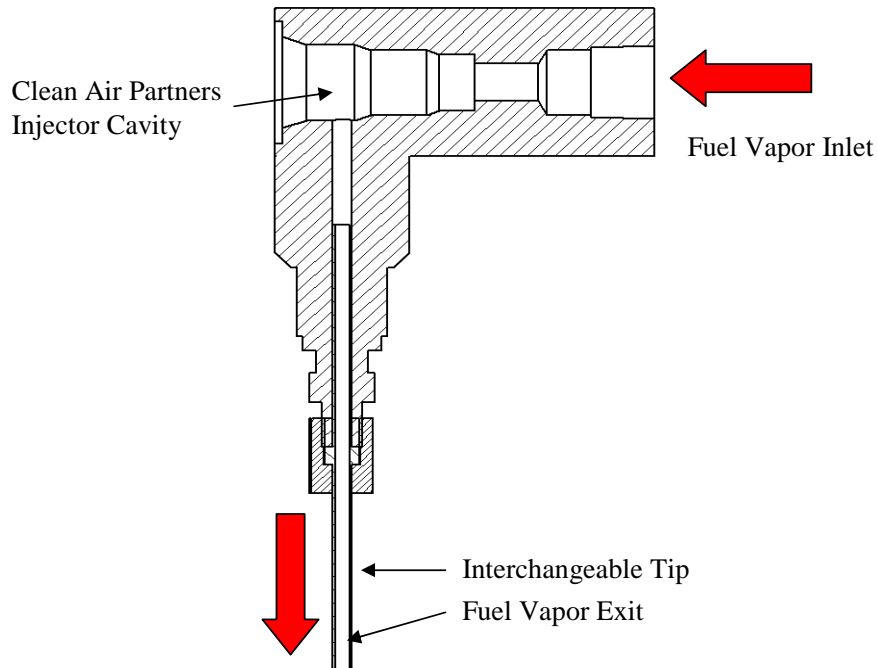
Stratified Fuel Injection Mounting Adapter
